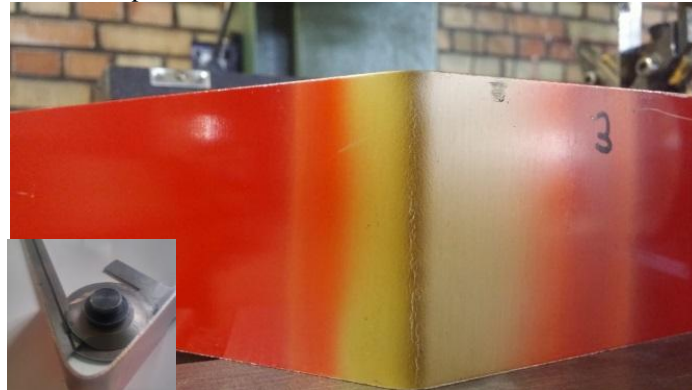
Locally Heated Bent Specimen with Angle of 60°
